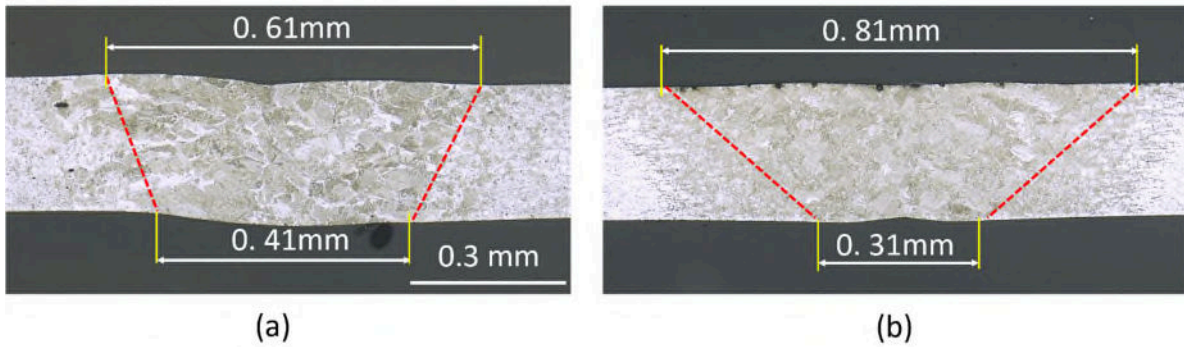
Welding samples of cold-rolled SPCD steel with a thickness of 0.25 mm were produced by (a) the novel GTAW torch and (b) the conventional GTAW torch.
